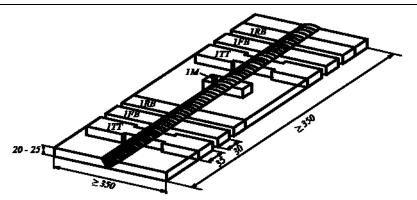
Additional butt weld test assembly for welding in downhand position: specimens are designated according to 4.9.3.5. Edge preparation shall be carried out according to Table 4.10.3.3 *Table 4.10.3.3
